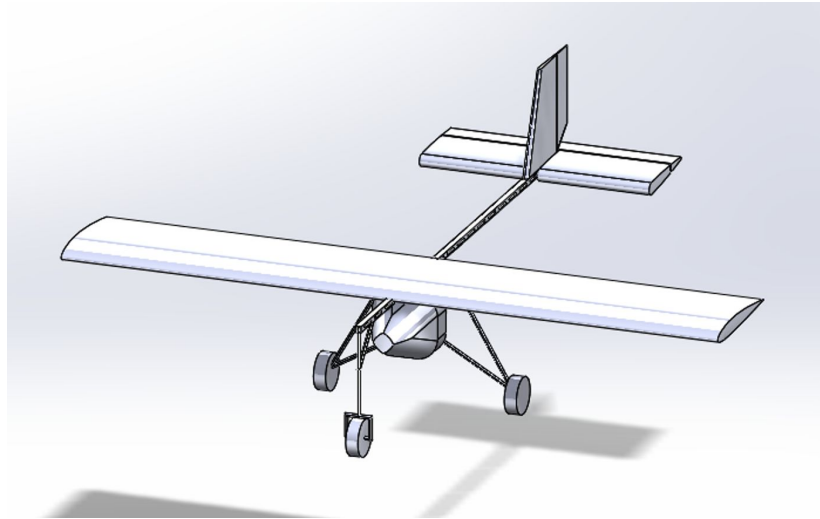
Straight Wing, Tricycle gear, One Ball System CAD Model
